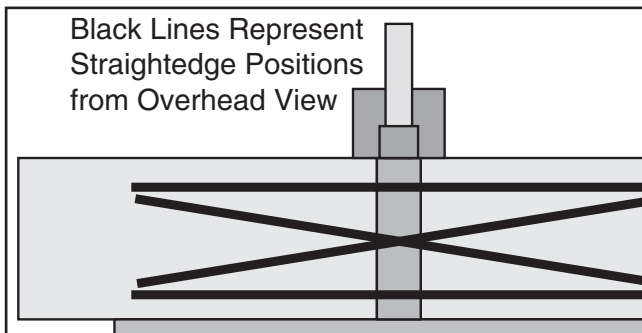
Straightedge positions for checking infeed/outfeed table parallelism.
